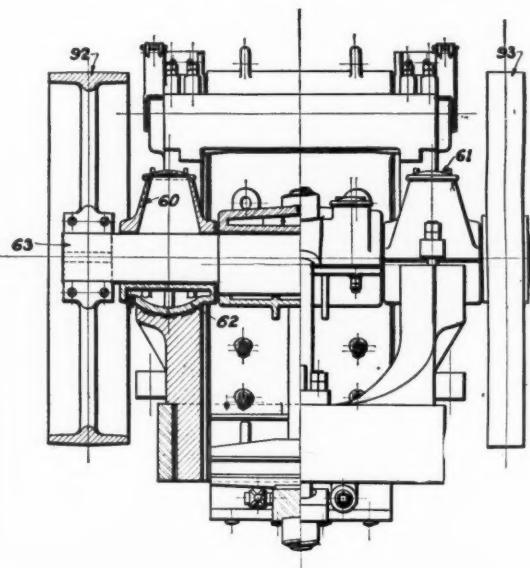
Recent design of an improved type of Blake jaw crusher for larger sizes
